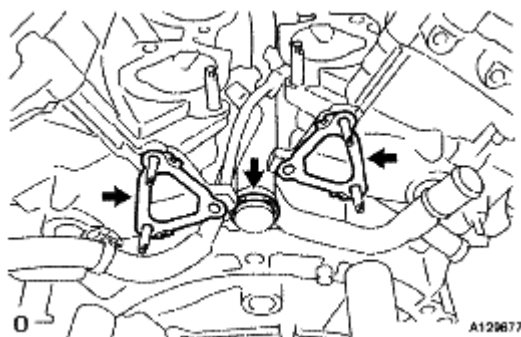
Identifying Water Outlet Gaskets & O-Ring
